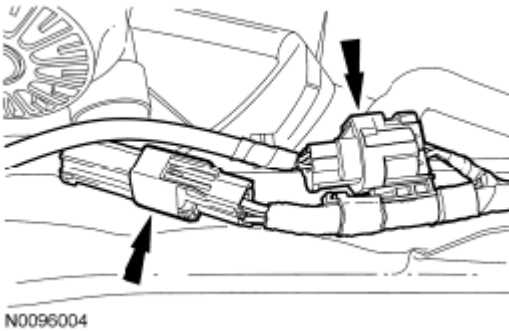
Locating Electronic Power Assist Steering System Electrical Connectors
